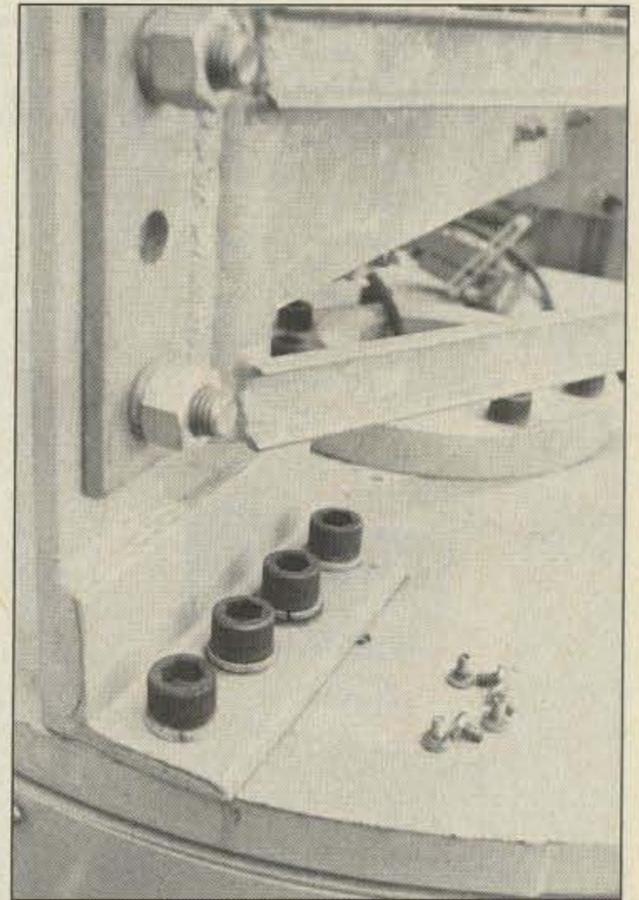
Photo C. Close-up of the method used to attach the tower to the rotating plate. (Photo by KT2B.)
